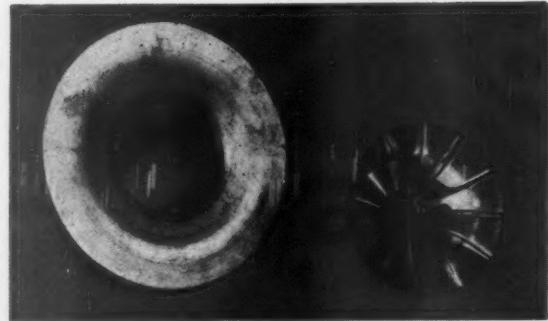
Above: The blower rotor, shown here with the diffuser, is an aluminium, pressure die casting. The only machining on it, apart from that necessary to form the Hirth coupling, is the removal of the thin flashes that remain on the edges of the radial blades
